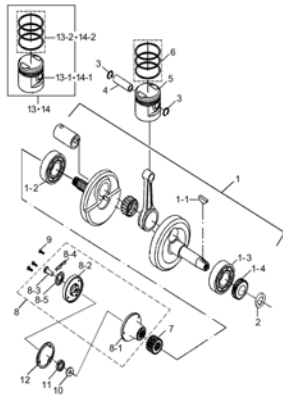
STARTER CLUTCH (P03-S060-0013)
